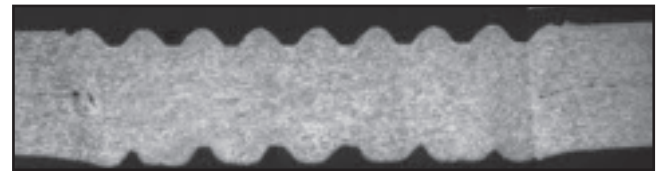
Cross section of an ultrasonic spot weld made on 0.8-mm-thick 1100 aluminum alloy.
